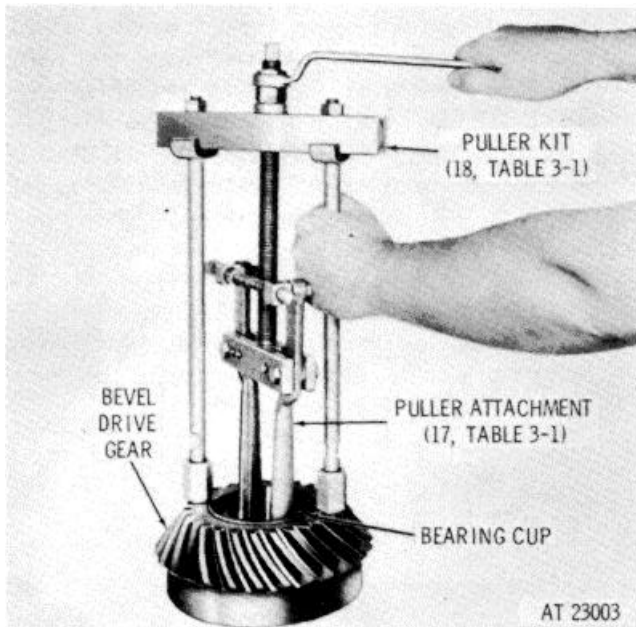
Removing bevel drive gear rear bearing outer race.
